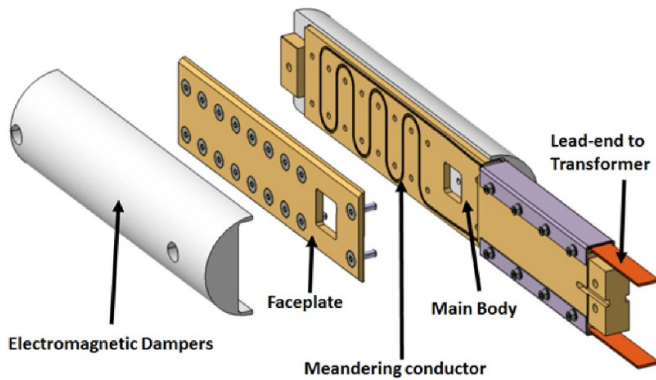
BOX sample assembly, showing the meandering cable in the former, faceplate and aluminium half shell dampers.
